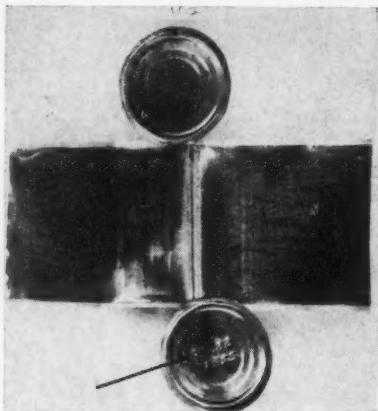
Coating fracture with perforation failure may result from sharp dies and heavy impressions used in embossing container ends.
